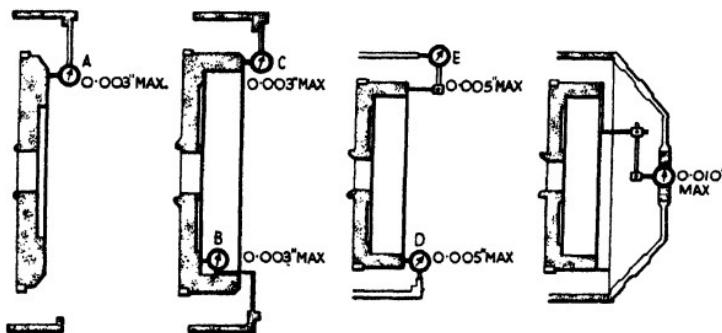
METHODS OF CHECKING FLYWHEEL AND HOUSING ALIGNMENT WITH CLOCK INDICATOR.
